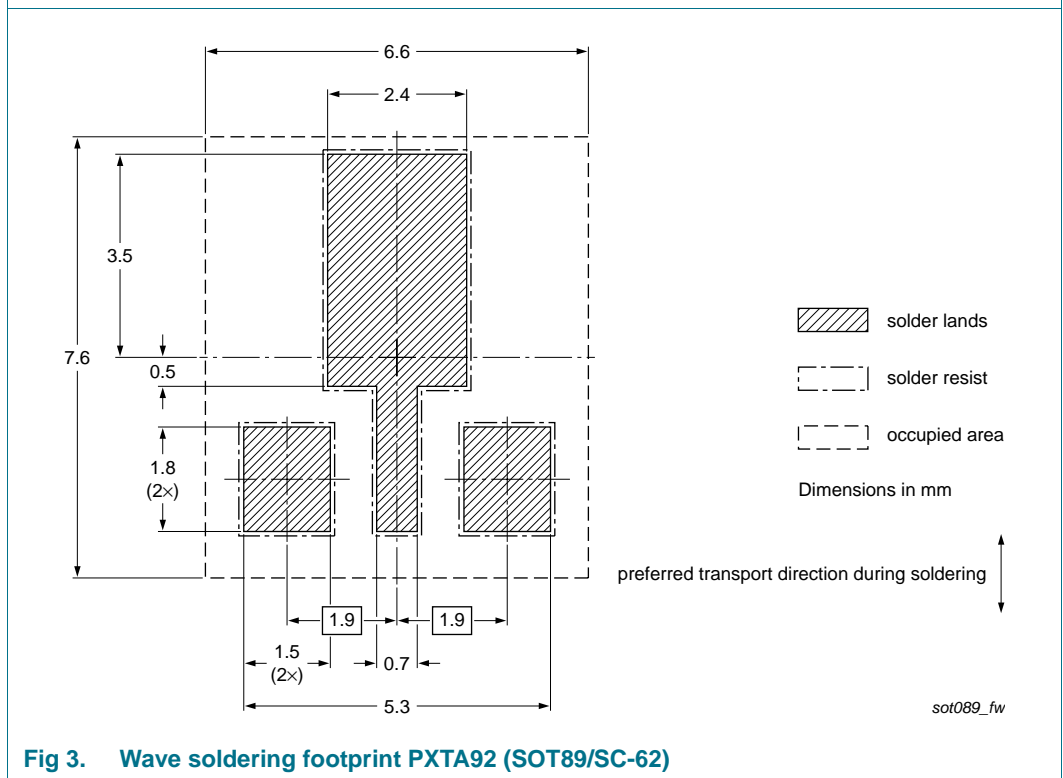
Wave soldering footprint PXTA92 (SOT89/SC-62)
